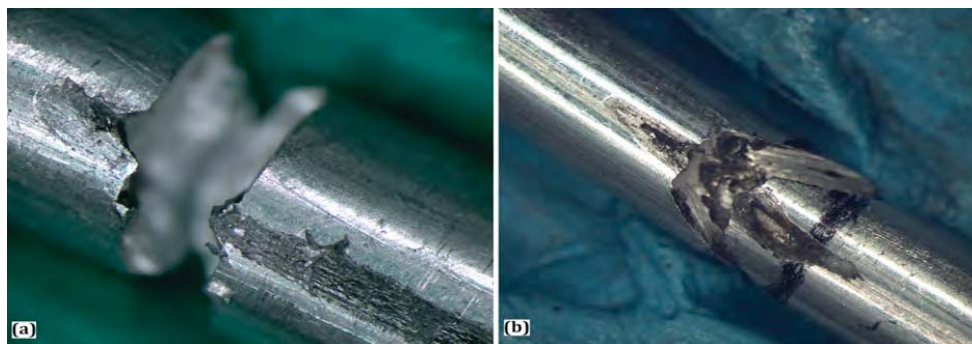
Fretting fatigue breaks in (a) biaxial and (b) uniaxial test.
